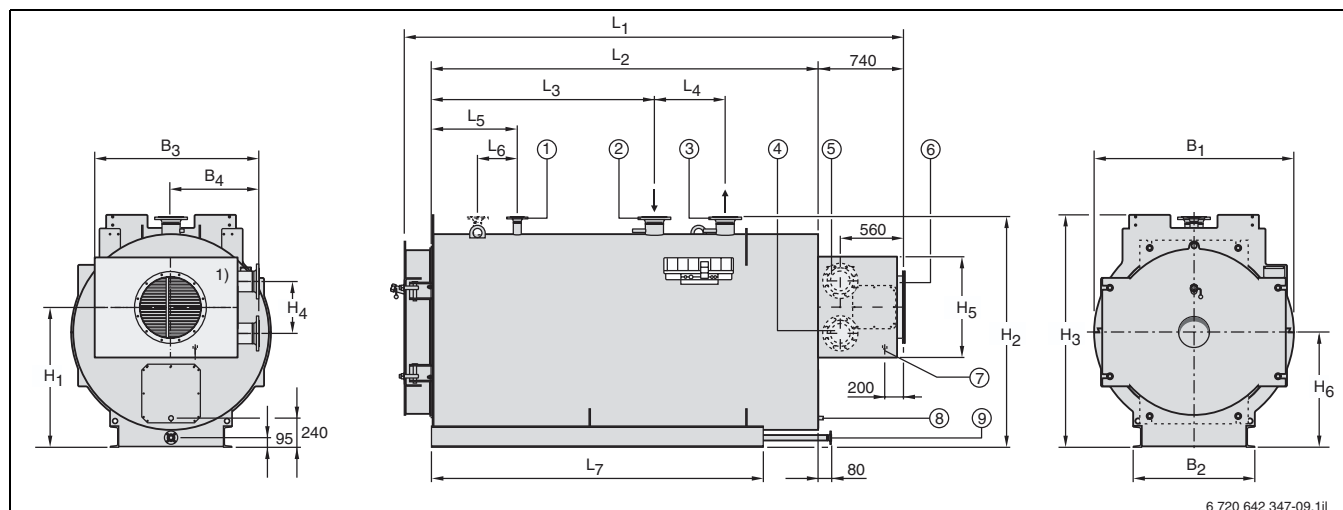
Dimensions Logano plus SB825L LN, boiler sizes 750 to 3500 (dim. in mm)
